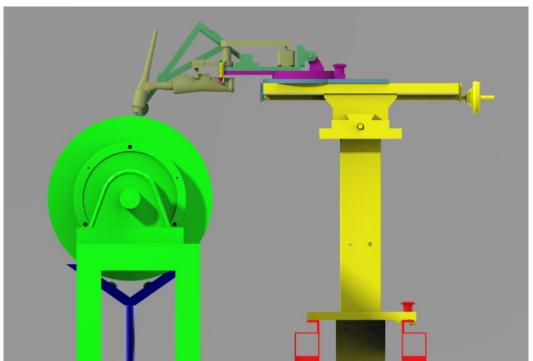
Welding from top on pipe with diameter 400mm
